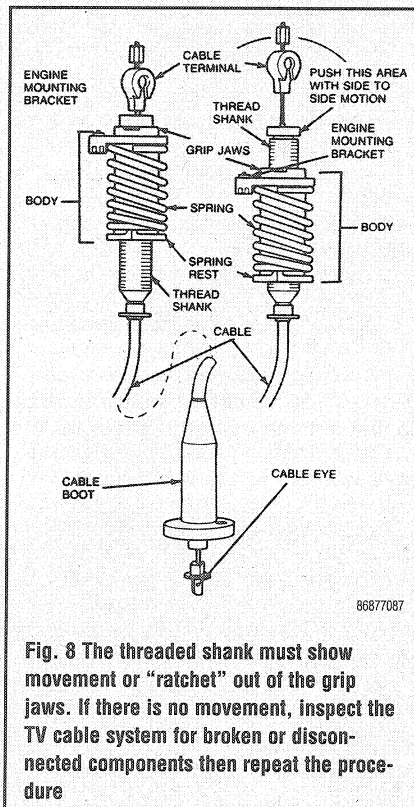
The threaded shank must show movement or "ratchet" out of the grip jaws. If there is no movement, inspect the TV cable system for broken or disconnected components then repeat the procedure
